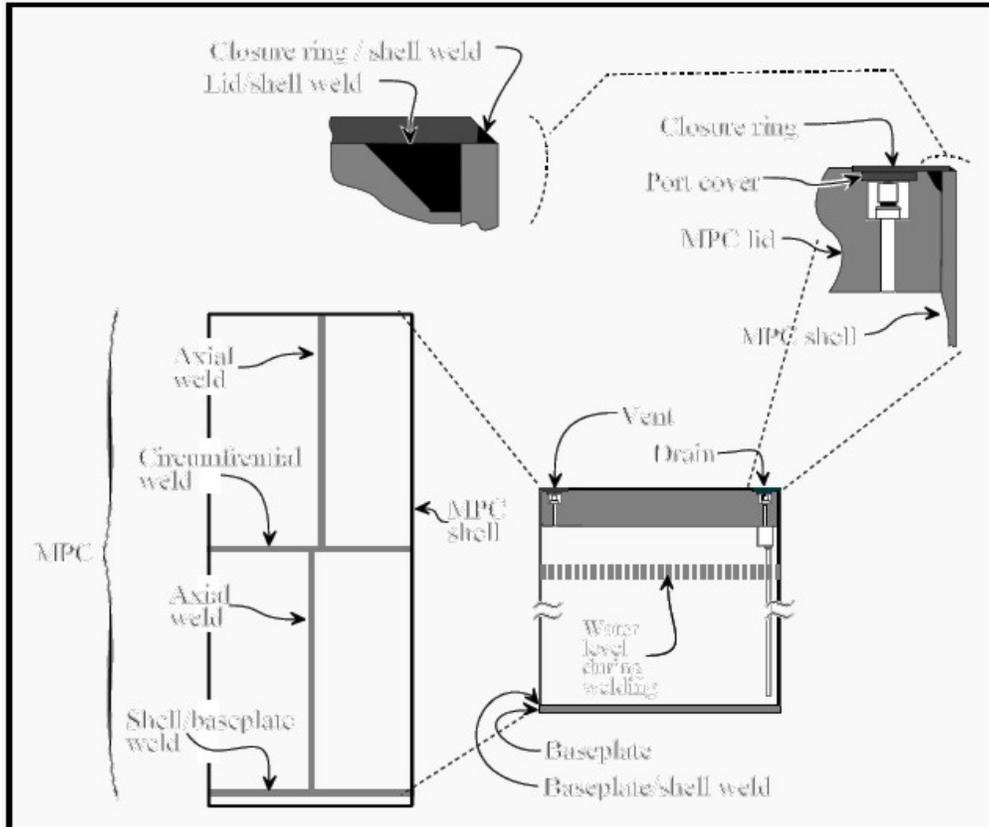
Drawing of Holtec HI-STORM 100 MPC Construction with Weld Locations (best available figure)<sup>84</sup>
